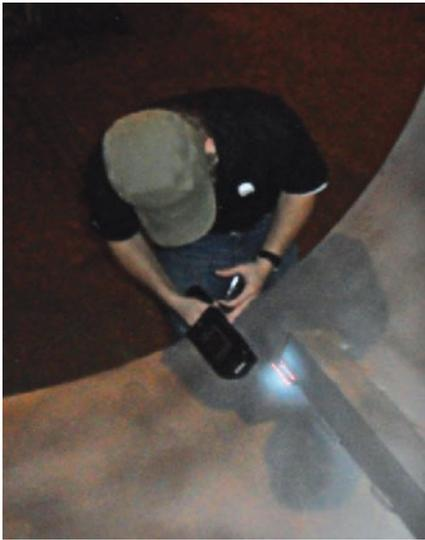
The same skewed fillet shown in Fig. 5 being scanned with the hand-held laser inspection tool.
